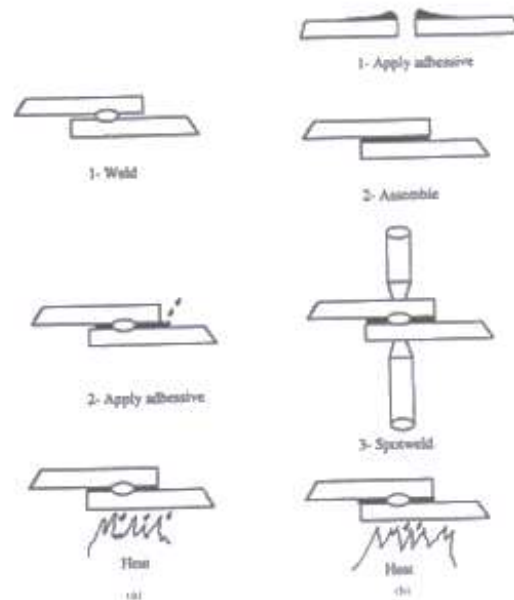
Weld-bonding Techniques (a) Flow-in and (b) Weld-through.
